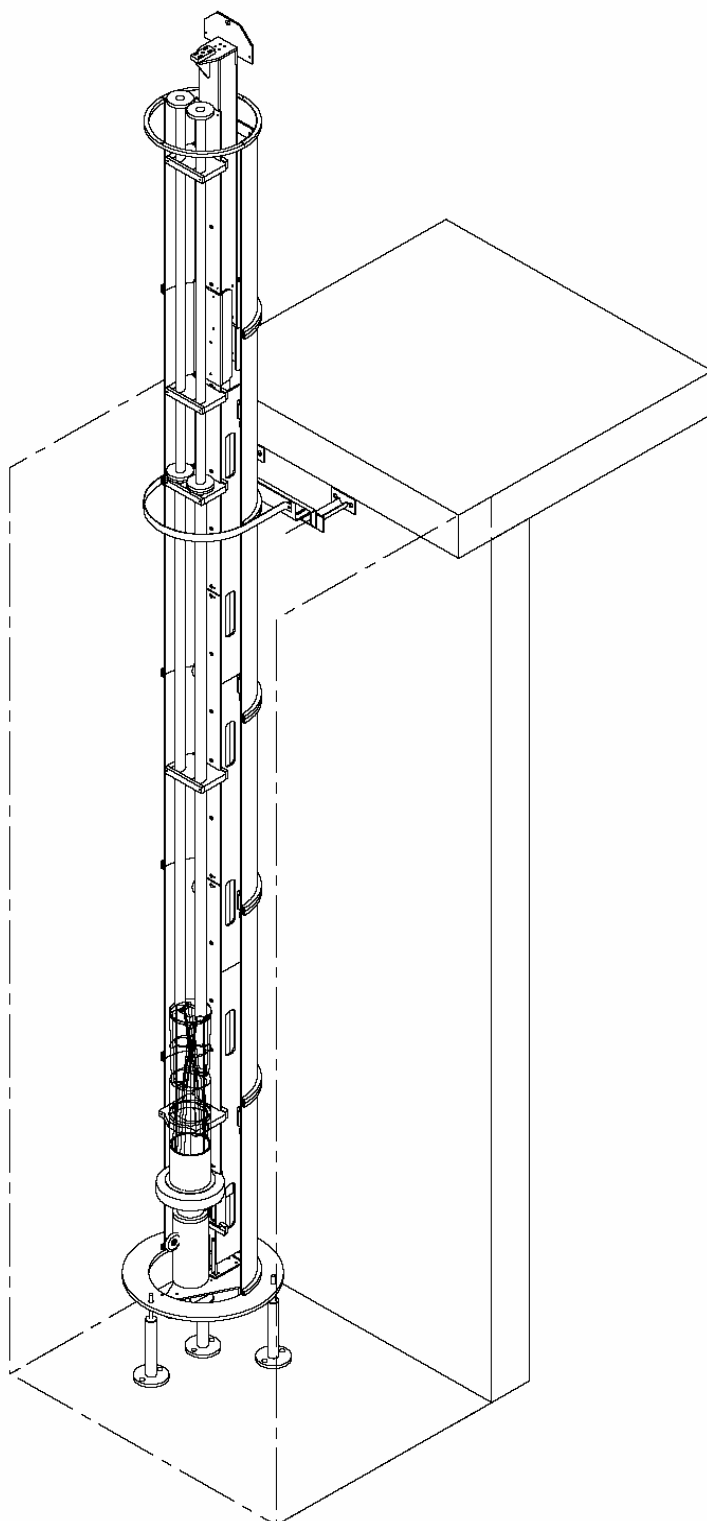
Vertical configuration of the Lifting Assembly with the Chamber
